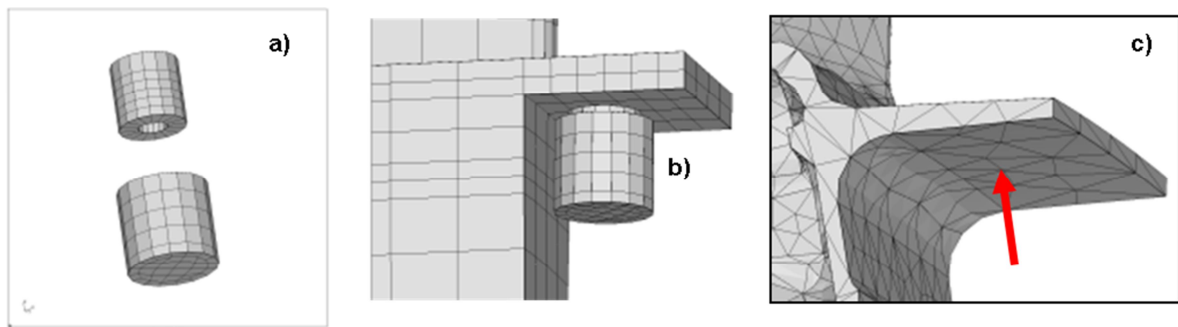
Geometrical features of the rocking damper derived from Erbts (2011). a) dummy damper and carrier, b) assembly of these dummy with a dummy blade, c) placement of the rocking damper for a real blade
